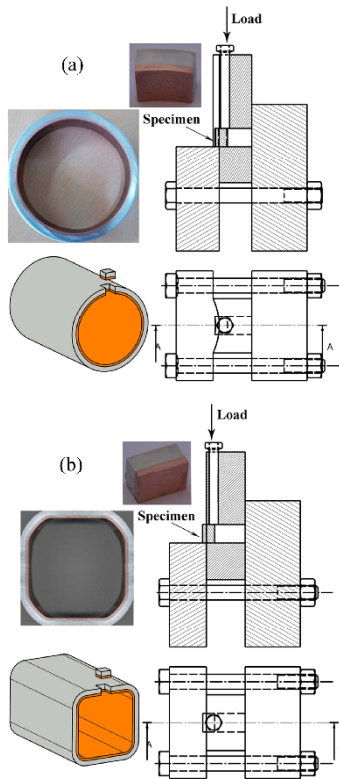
Schematic of samples and the supplemental fixture for shear test of joints: (a) For explosive welded circular pipe; (b) for shape rolled square tube.
